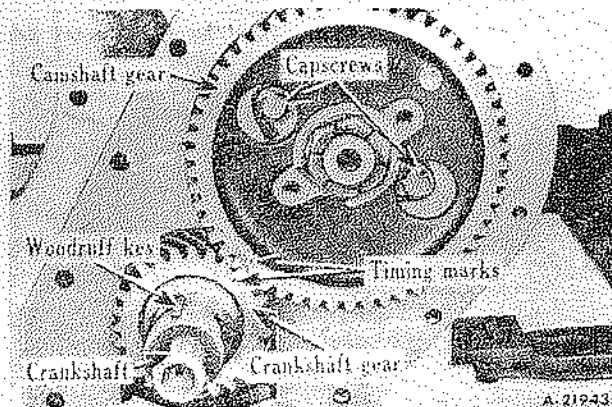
Timing gear timing marks and camshaft thrust plate details
